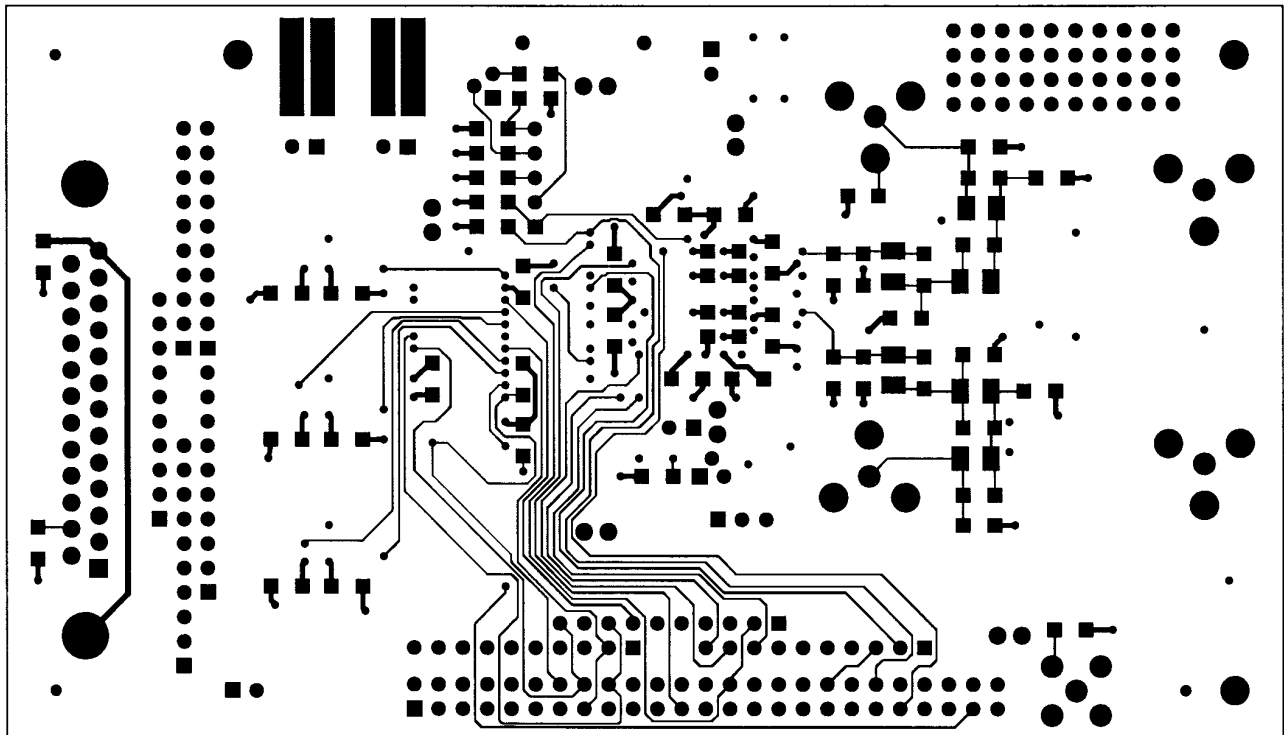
BOTTOM LAYER SOLDER SIDE
